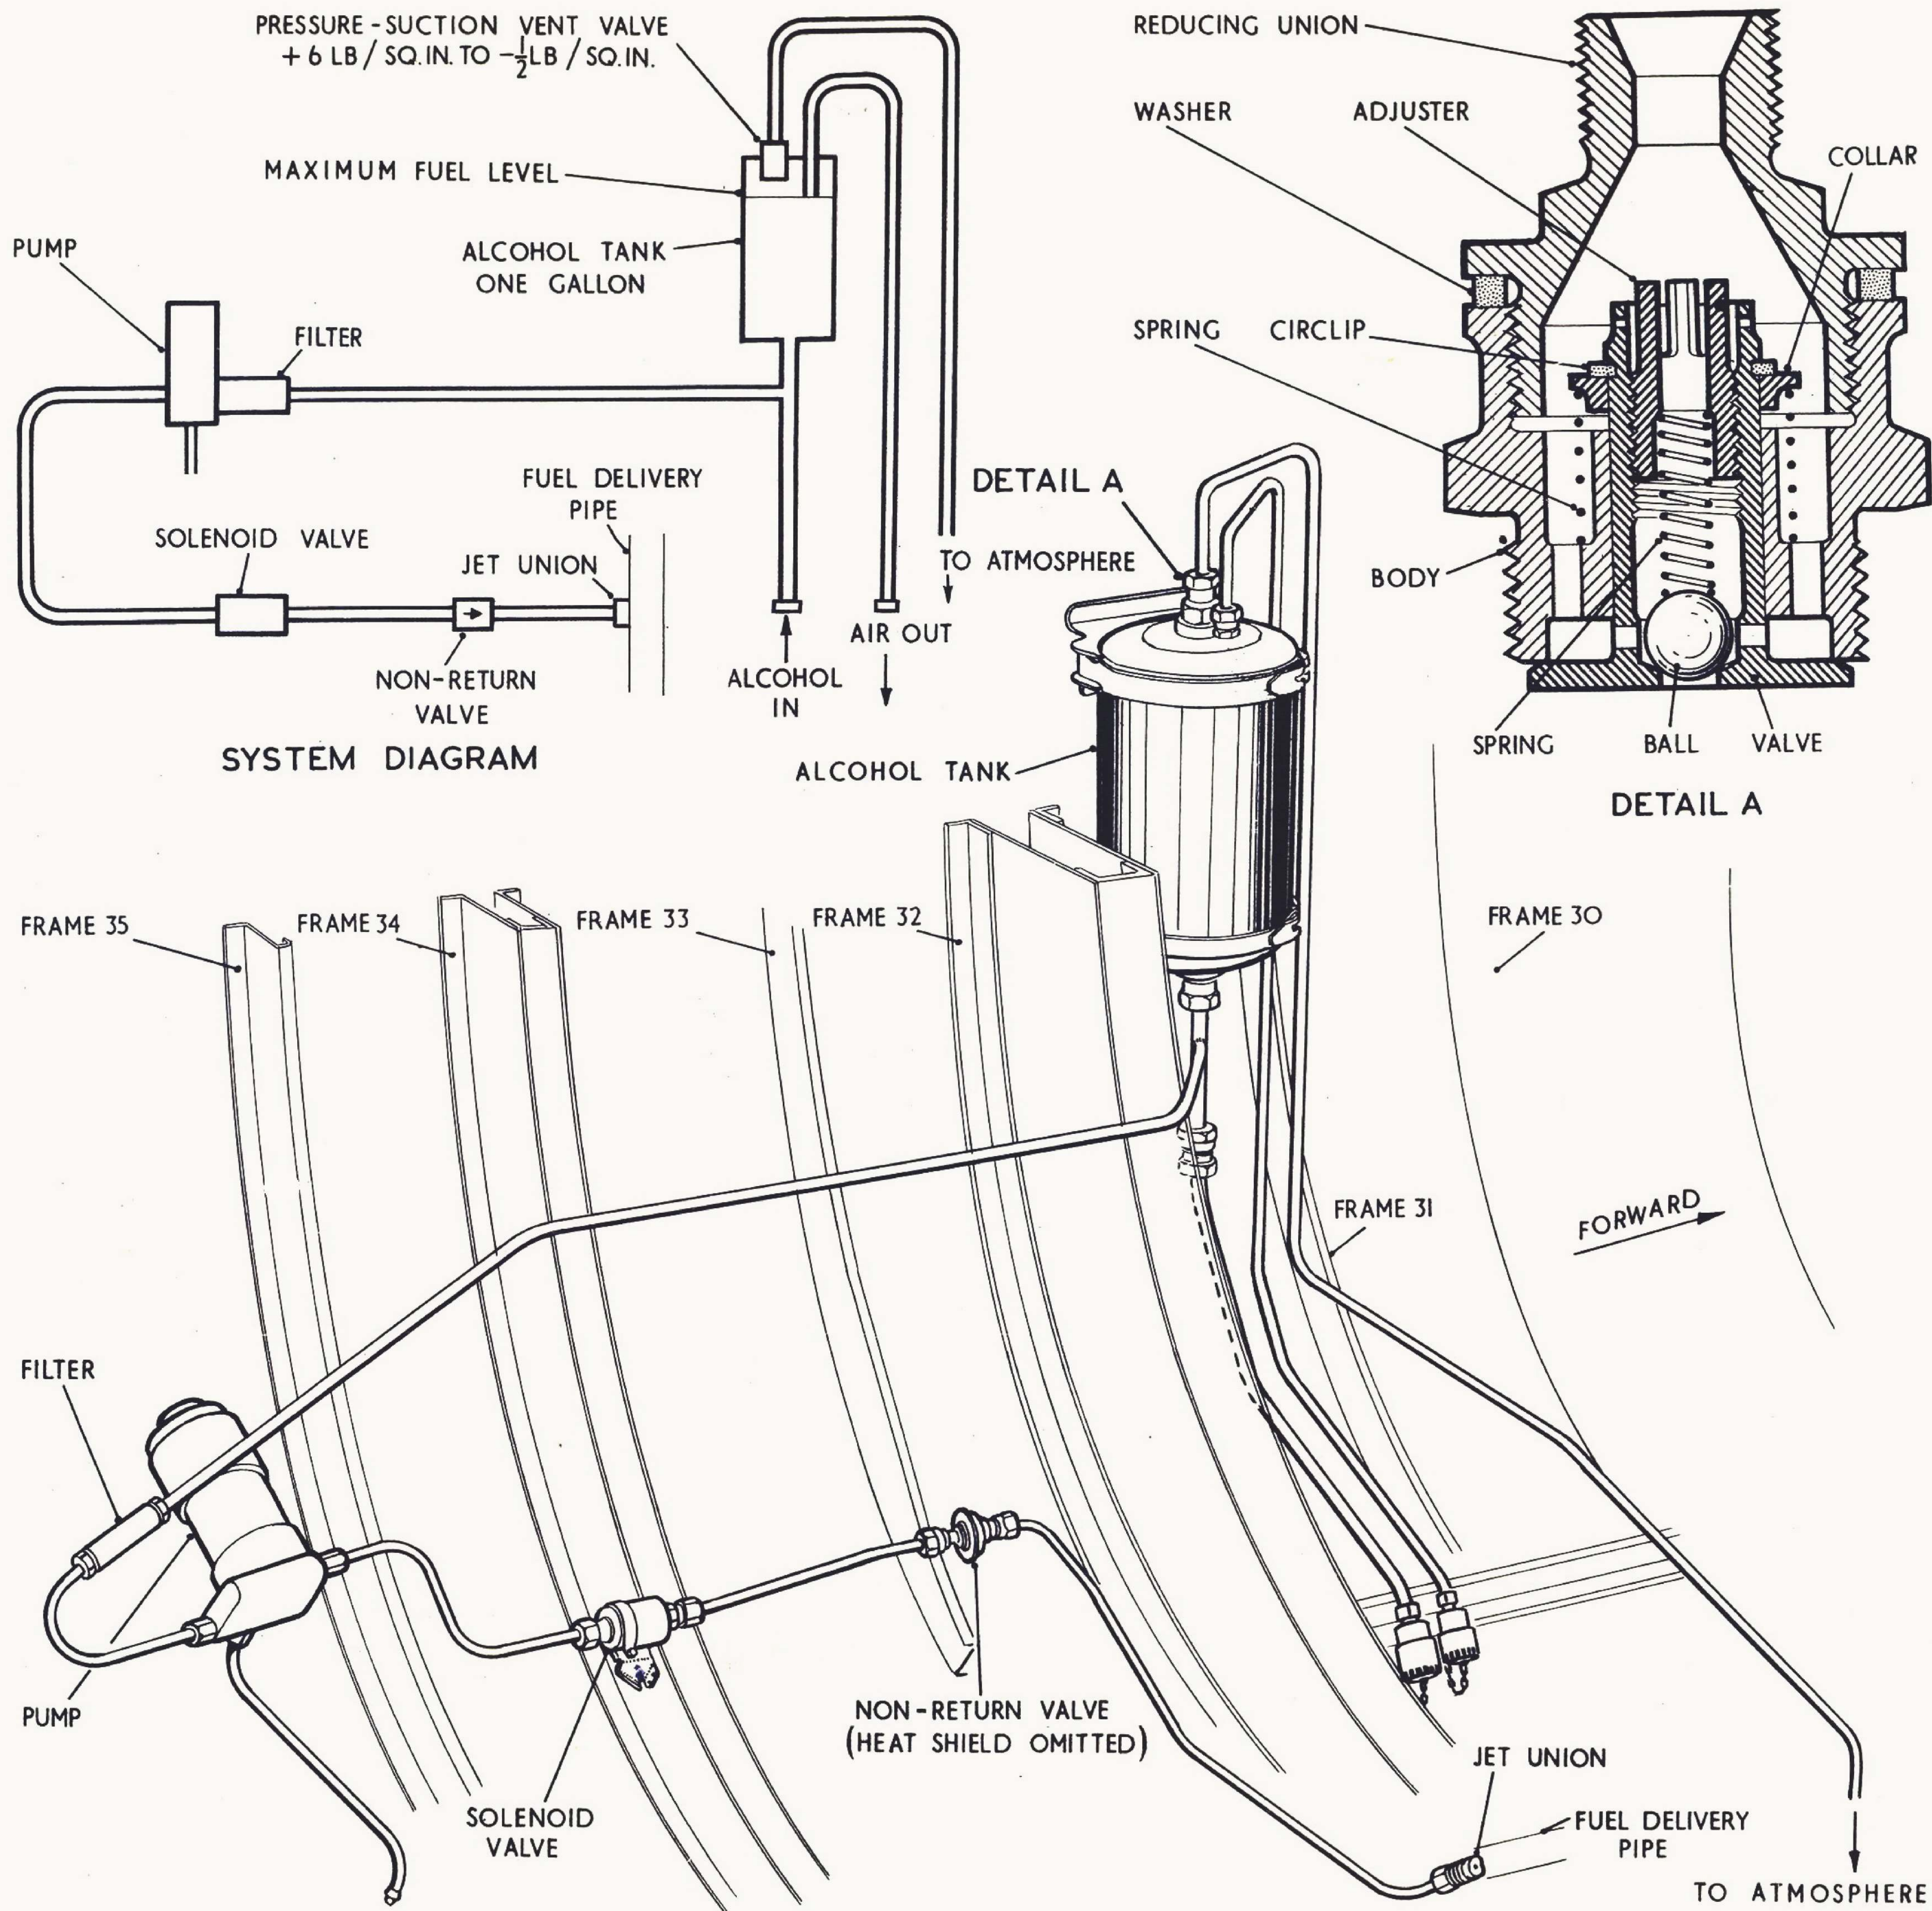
FUEL FILTER DE-ICING SYSTEM
